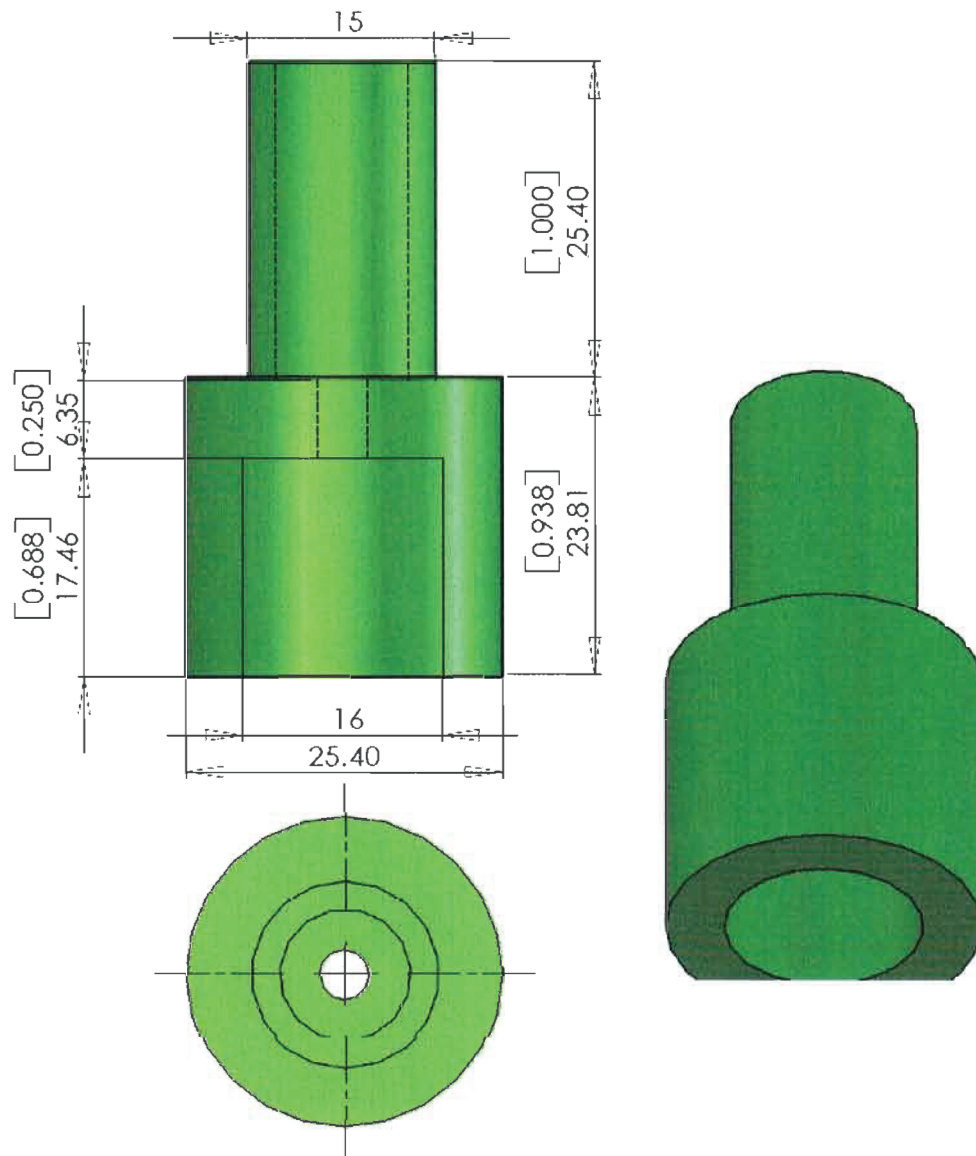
Dimensions of adaptor used to attach the original DC motor shaft to Stage v2.0 servo motor spindle.
